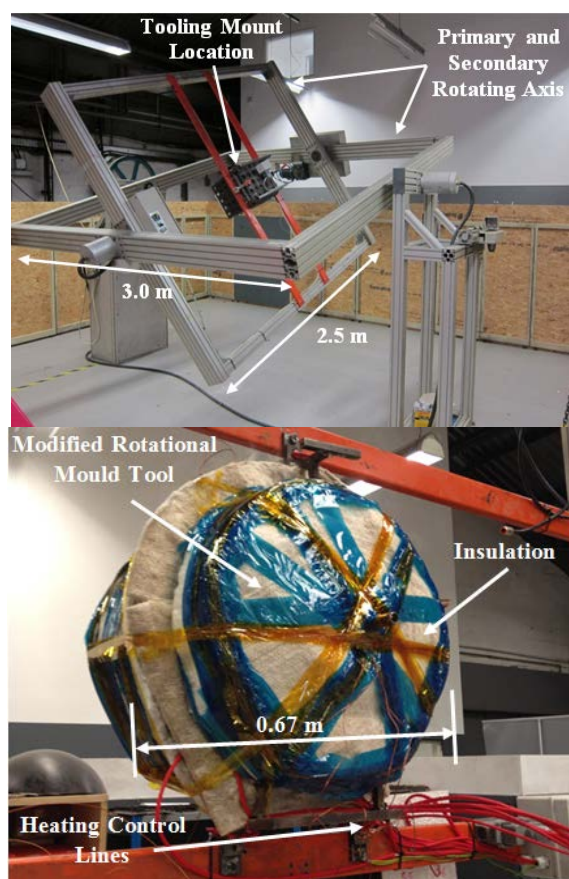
Modified Rotational Moulding System and Electrically-Heated Tooling.
